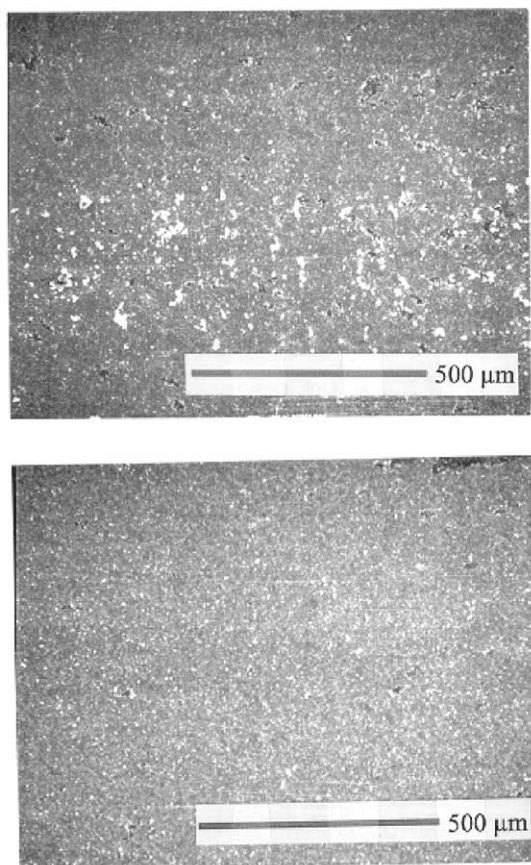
Fracture surfaces of brazed V-5Ti-5Cr/304 stainless steel joint with Au-Ni filler: (a) V-5Ti-5Cr side; (b) stainless steel side.
